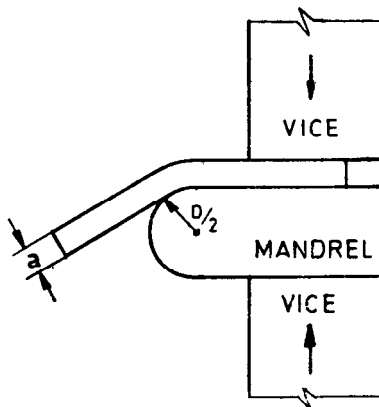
BEND TEST THROUGH AN ANGLE OVER A SPECIFIED RADIUS'
